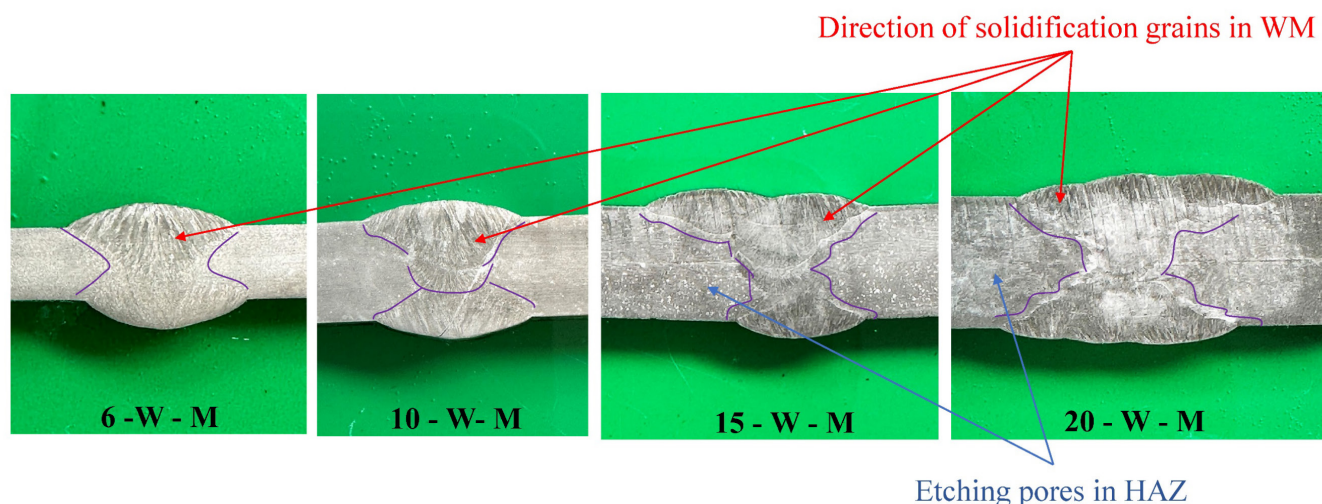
| Cross-section of macrostructure highlighting weld passes and grain morphology. [Colour figure can be viewed at [wileyonlinelibrary.com](https://onlinelibrary.wiley.com)]
